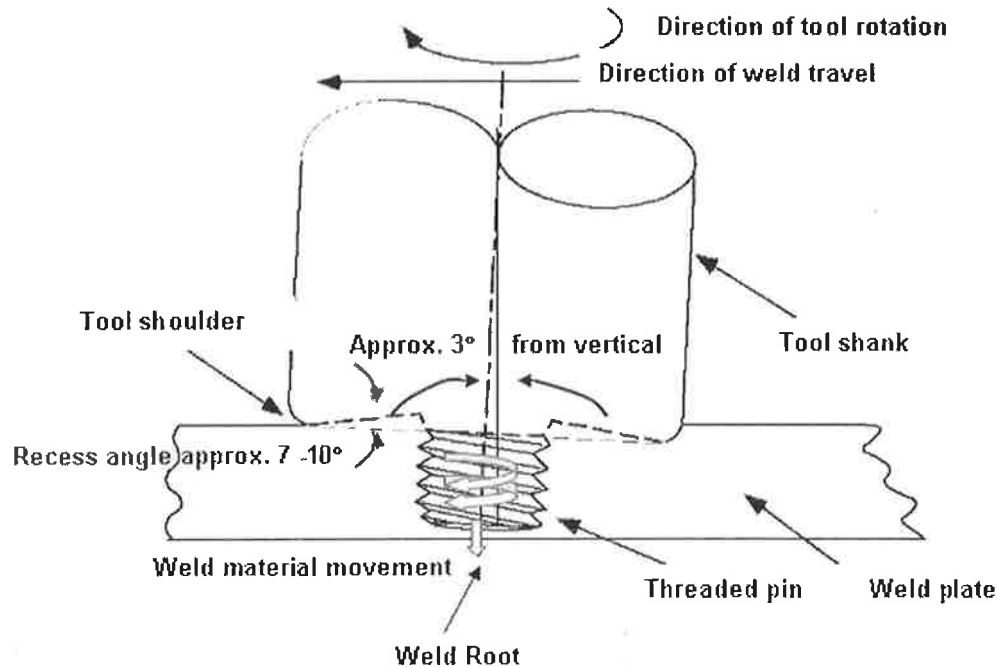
The concept of the GSP 5651 tool and material movement around the welding pin during FSW [67].
